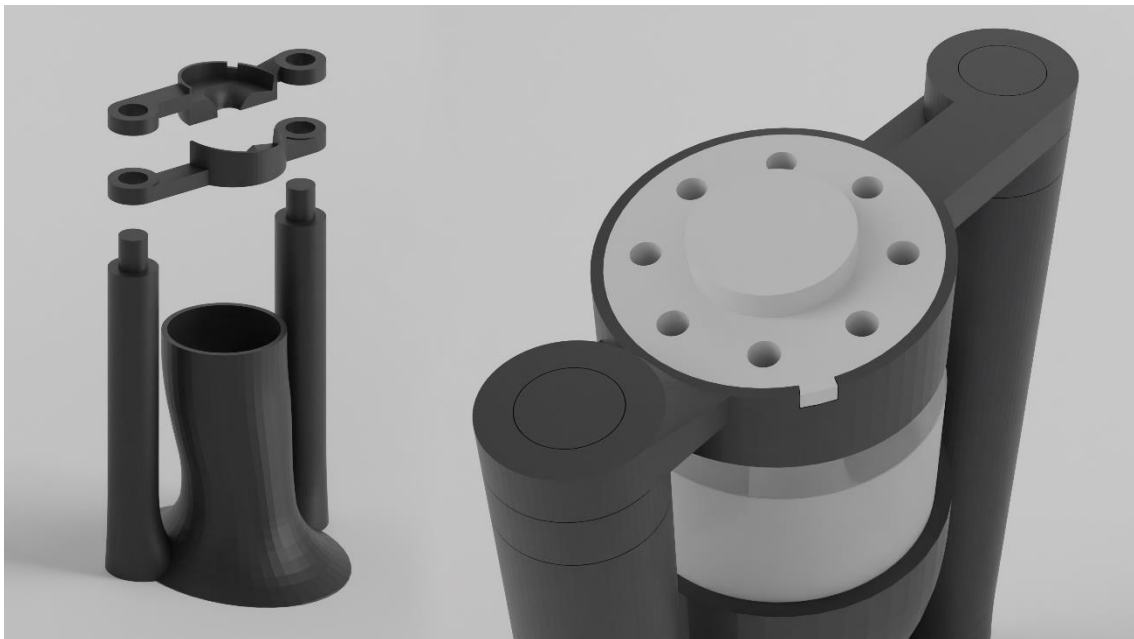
Exploded view of the component parts of the support for positioning (left) and detail view of how the bone and the liner fit inside the support for pouring the silicone (right)
